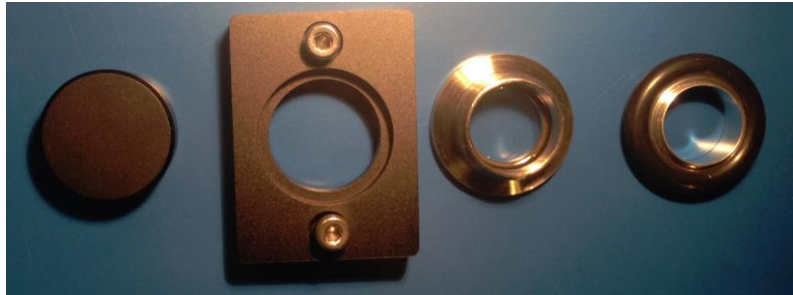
Replace the fiber port. 1) Cap, 2) Clamp, 3) Window, 4) O-Ring
